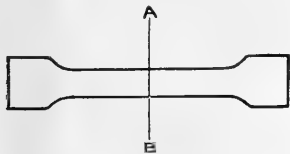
Test piece of wrought iron welded at A B. See Fig. 6 for micro-section.
